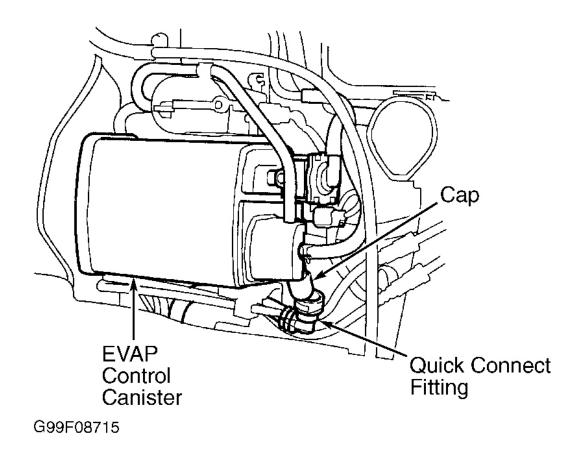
Disconnecting Quick-Connect Fitting From EVAP Canister Courtesy of AMERICAN HONDA MOTOR CO., INC.
